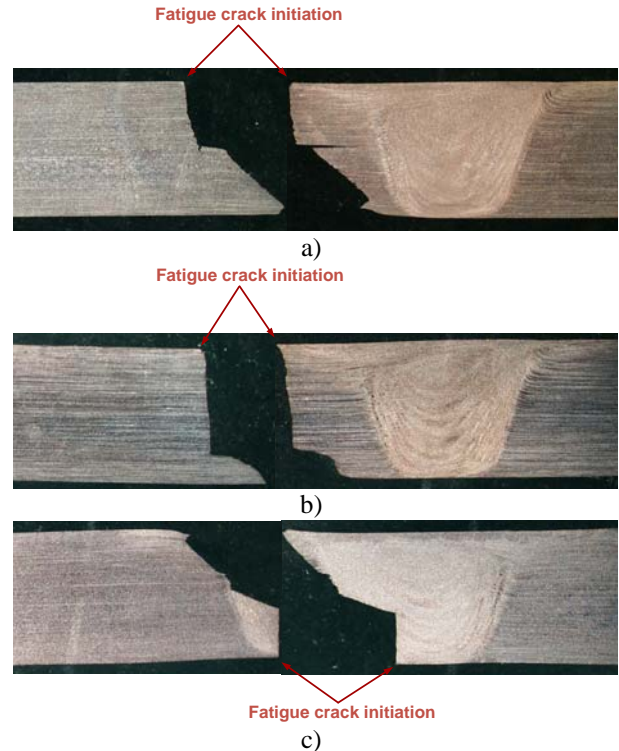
Fracture surface details – specimens a) IT23, b) IT26, and c) IT24.
